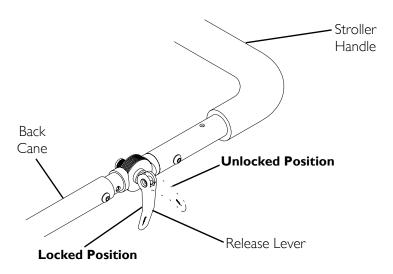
Adjusting Adjustable Angle Stroller Handles
